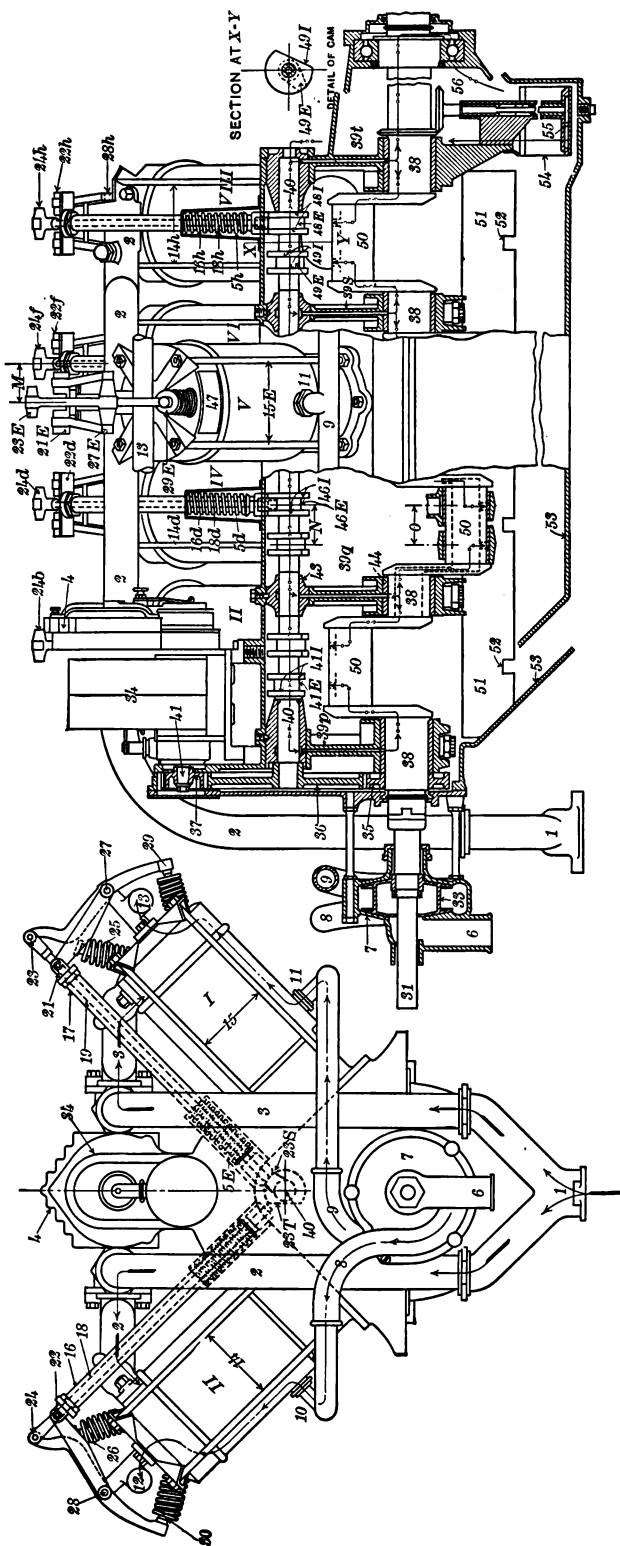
CURTIS 8-CYLINDER V-ENGINE, PARTIAL LONGITUDINAL SECTION
